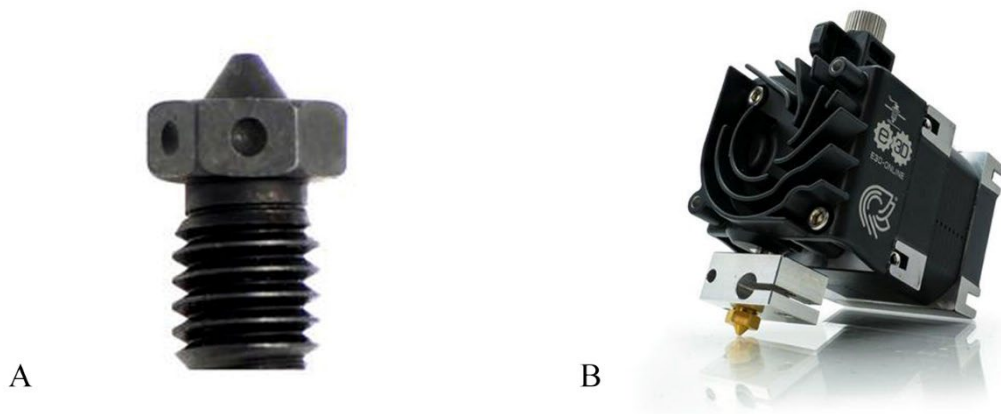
A) picture of E3D NozzleX [62]. B) E3D Hemera extruder [63].
